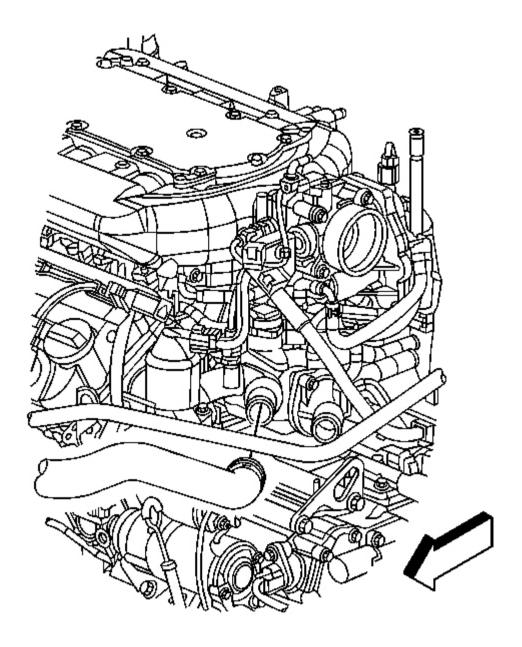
View Of Radiator Inlet Hose Courtesy of GENERAL MOTORS CORP.
